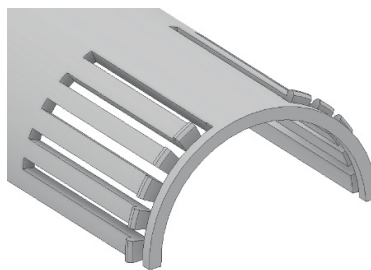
DETAILS OF THE LOCKING FINGERS ON THE SLEEVE THAT RETRACT AND EXPAND WHEN RECIPROCATED AXIALLY INSIDE THE SLEEVE
